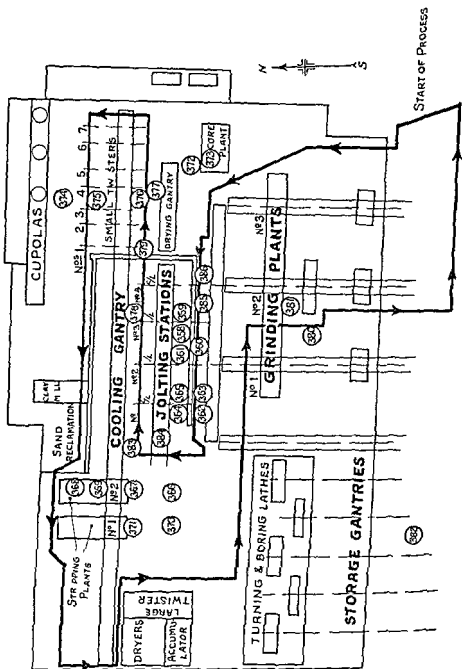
LAYOUT OF IRON FOUNDRY W SAND SPUN PIPE PLANT
